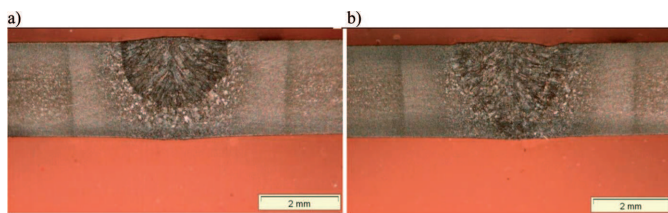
Macrostructure of the bead-on-plate welds produced by the HPDDL laser on the 2.5 mm thick sheet of S420MC steel at heat input of: a) 330 J/mm, (2.2 kW, 400 mm/min), b) 380 J/mm (2.2 kW, 350 mm/min)
